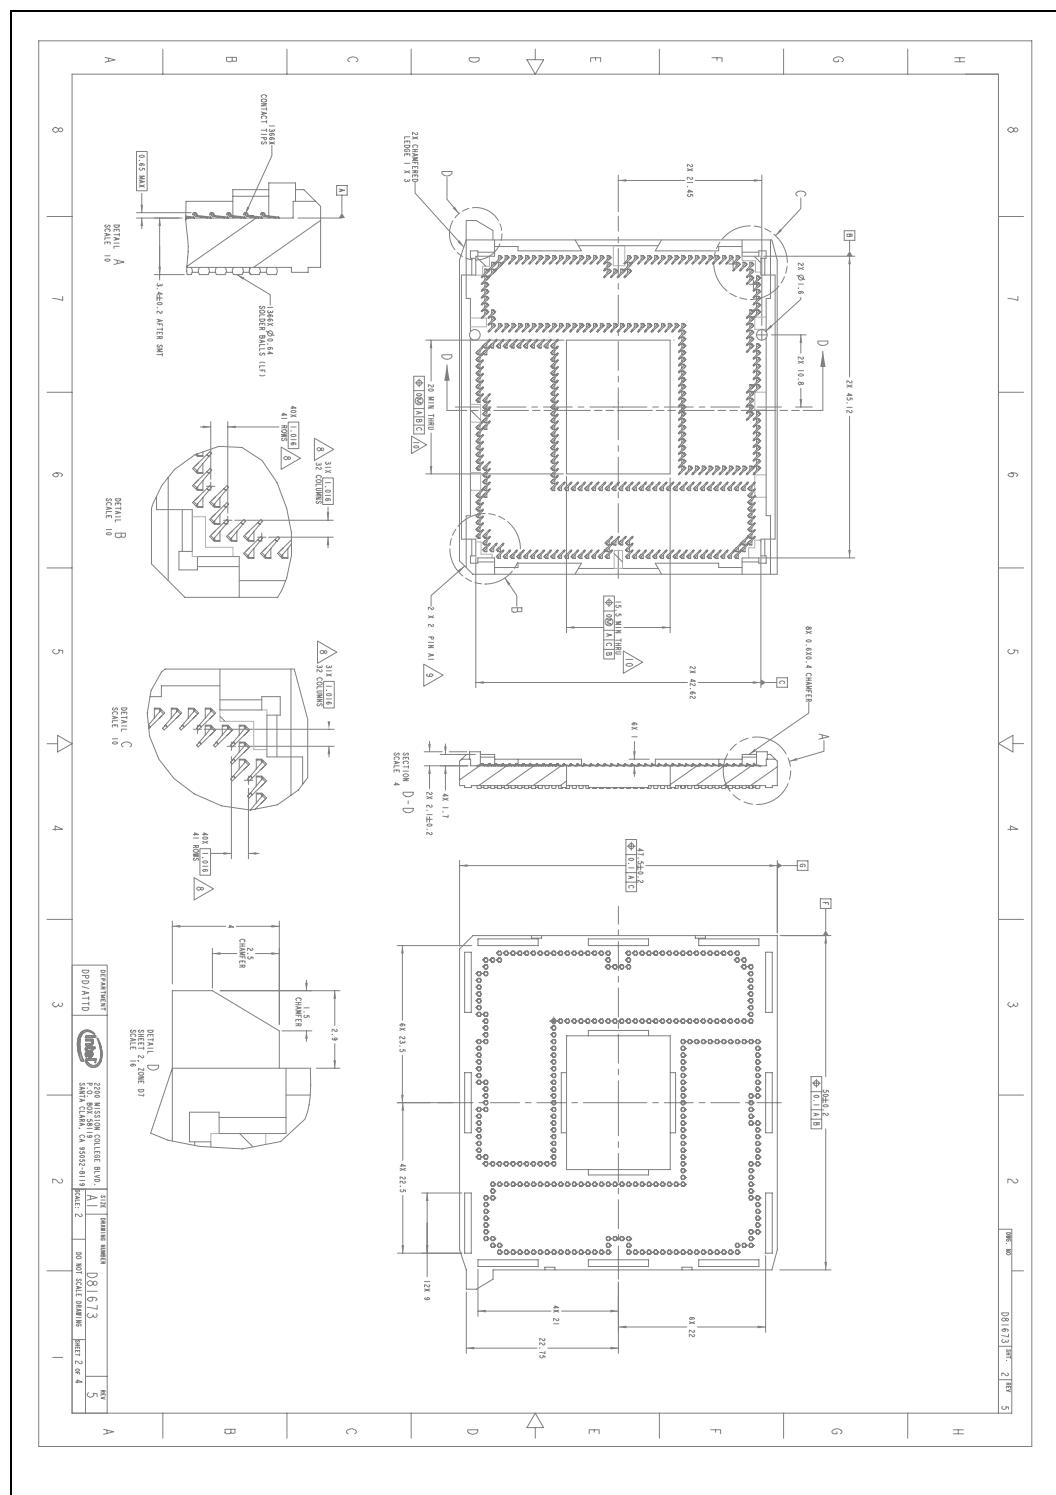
Socket Mechanical Drawing (Sheet 2 of 4)
